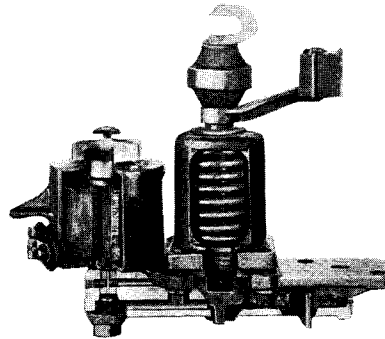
Cylinder and Magnet Valve Unit Cut to Show Interior Details
